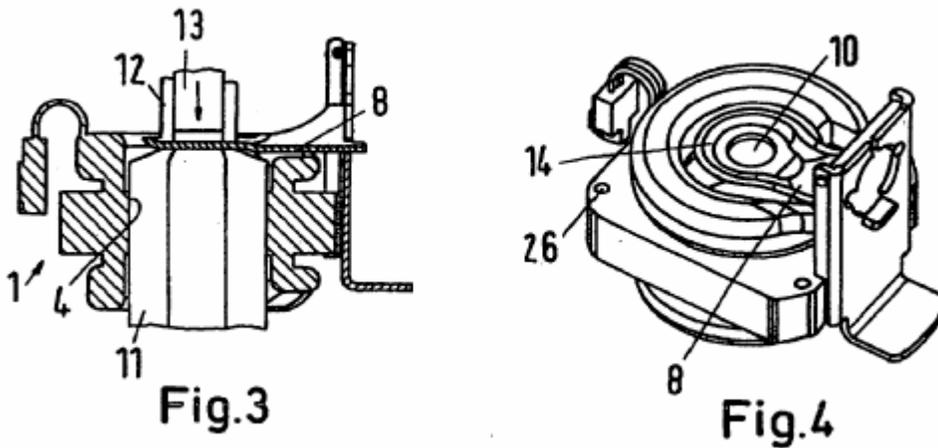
is a sectional view according to Figure 1 with an inserted tool, while Figure 4 is a perspective view according to Figure 2 after forming an opening for the first bearing. *Id.* at [0023-24].
